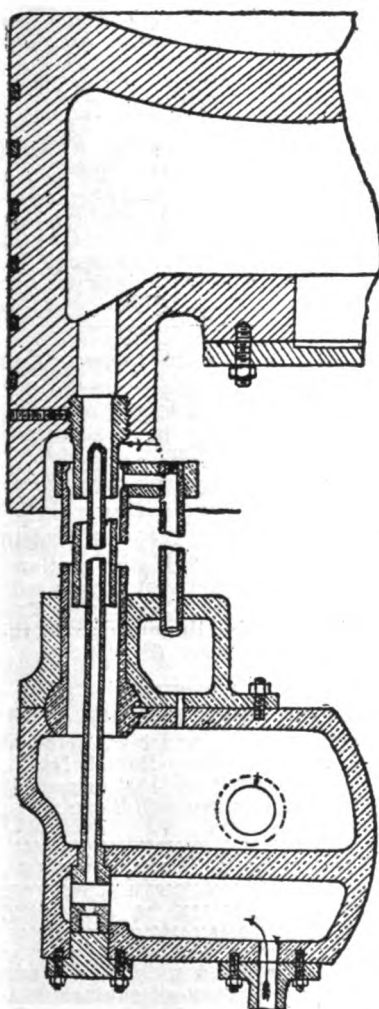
Piston cooling of Sulzer Diesel engines of French motor gunboats
